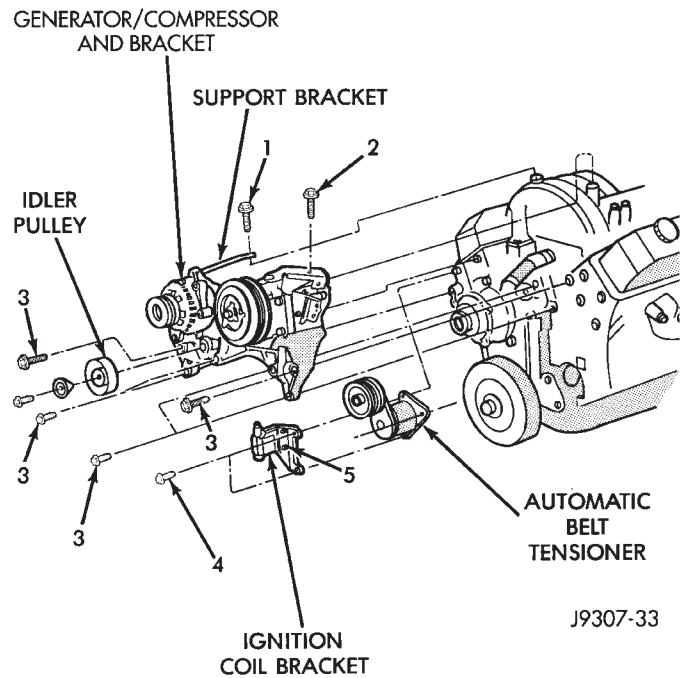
Generator and A/C Compressor Mounting Bracket—5.2/5.9L Engines
